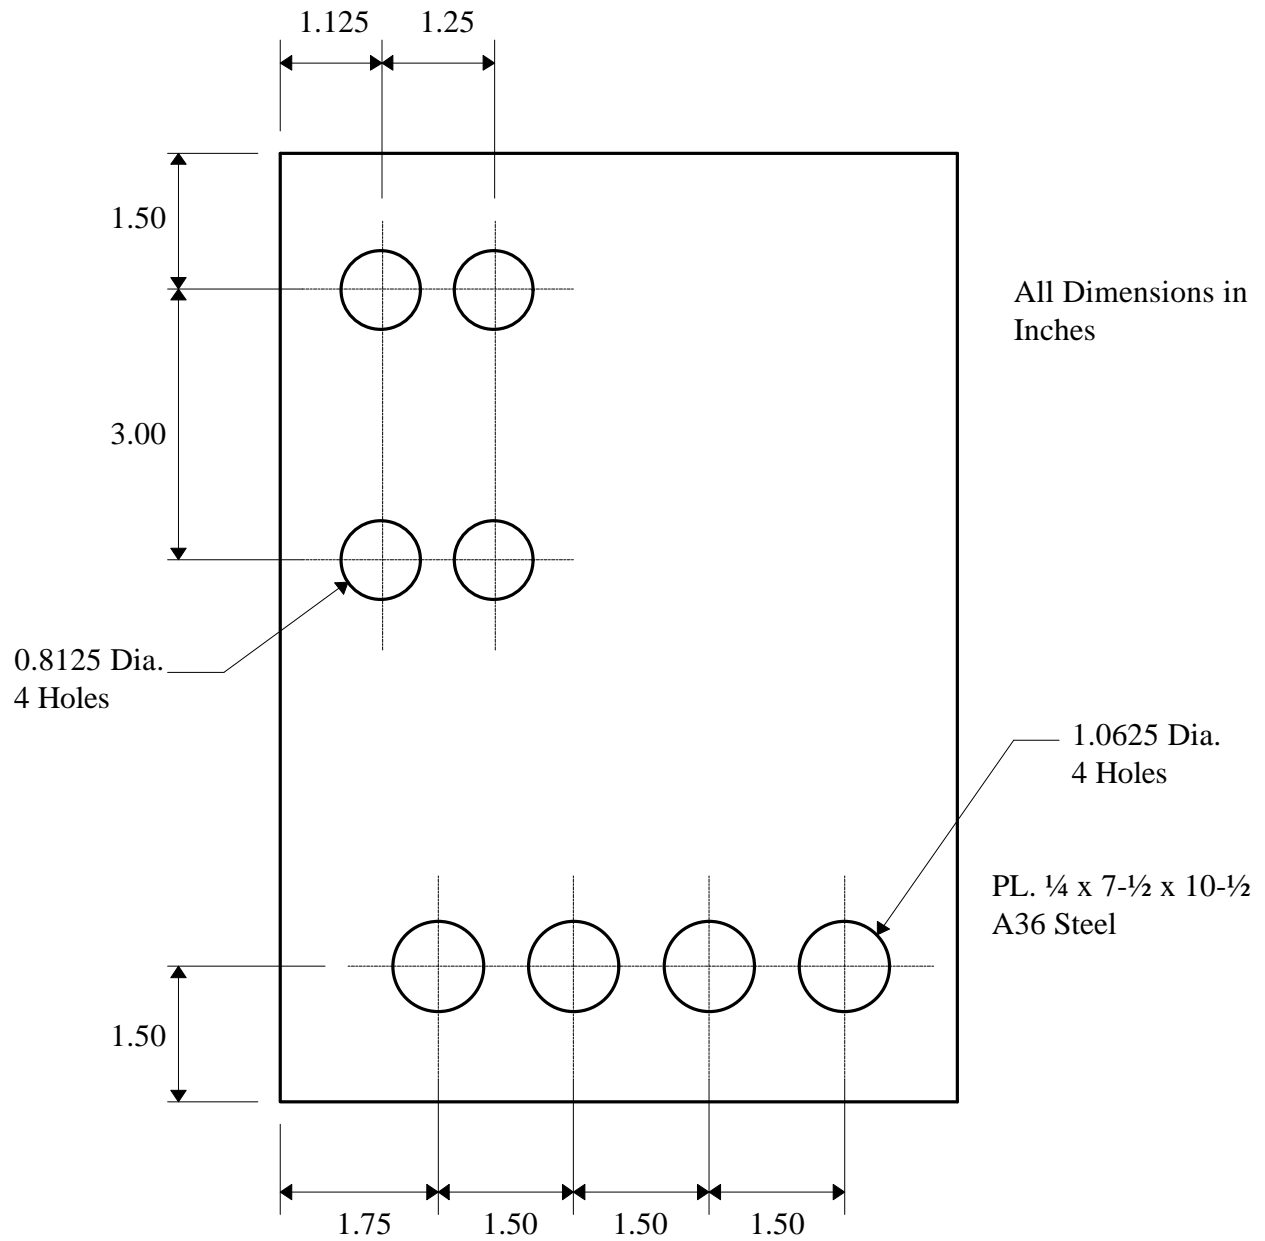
Dimensions of grip plate for the 2x4 test specimens.
